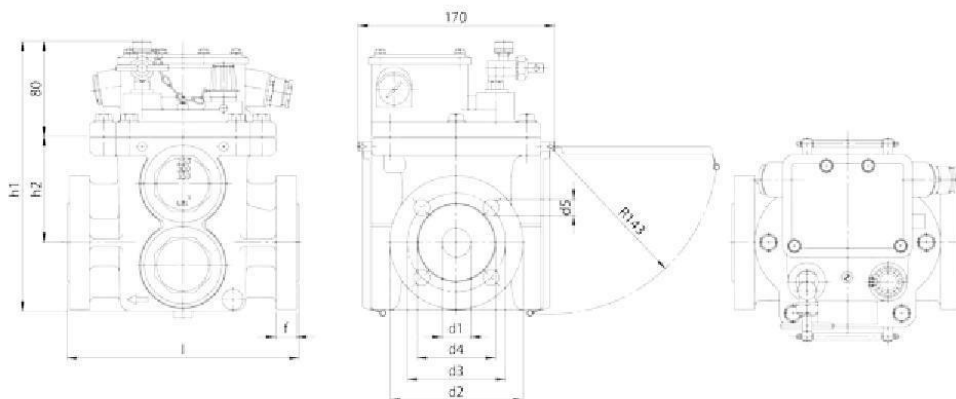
Dimensional drawing, type 05, 06, 07, 08, 09, 24
